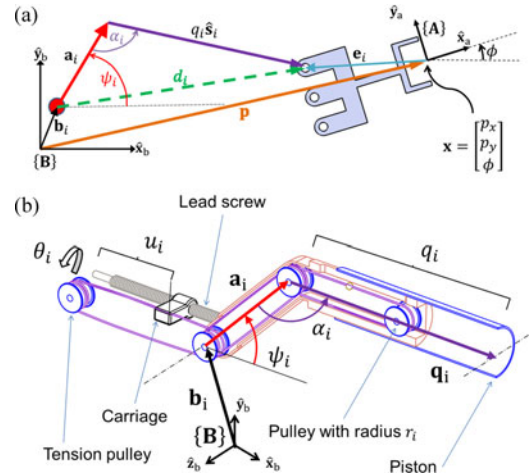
Kinematic diagram for 3RPR manipulator. (a) One of the three kinematic chains is shown schematically for the 3RPR design. (b) The prismatic link is actuated through a closed-loop wire rope. This approach allows the motors to be placed at an arbitrary distance from the link. The motors drive a carriage on a leadscrew which transmits motion to the piston.
